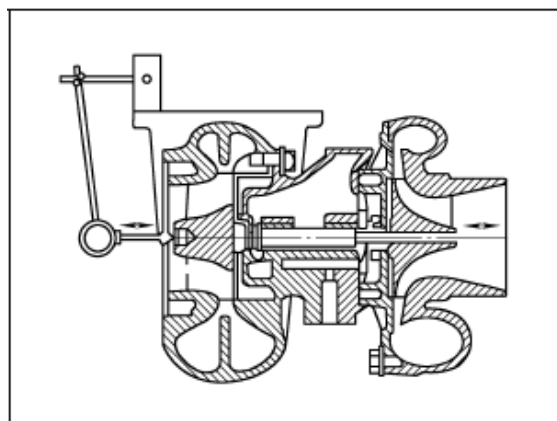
Measuring the axial clearance of the impeller shaft
